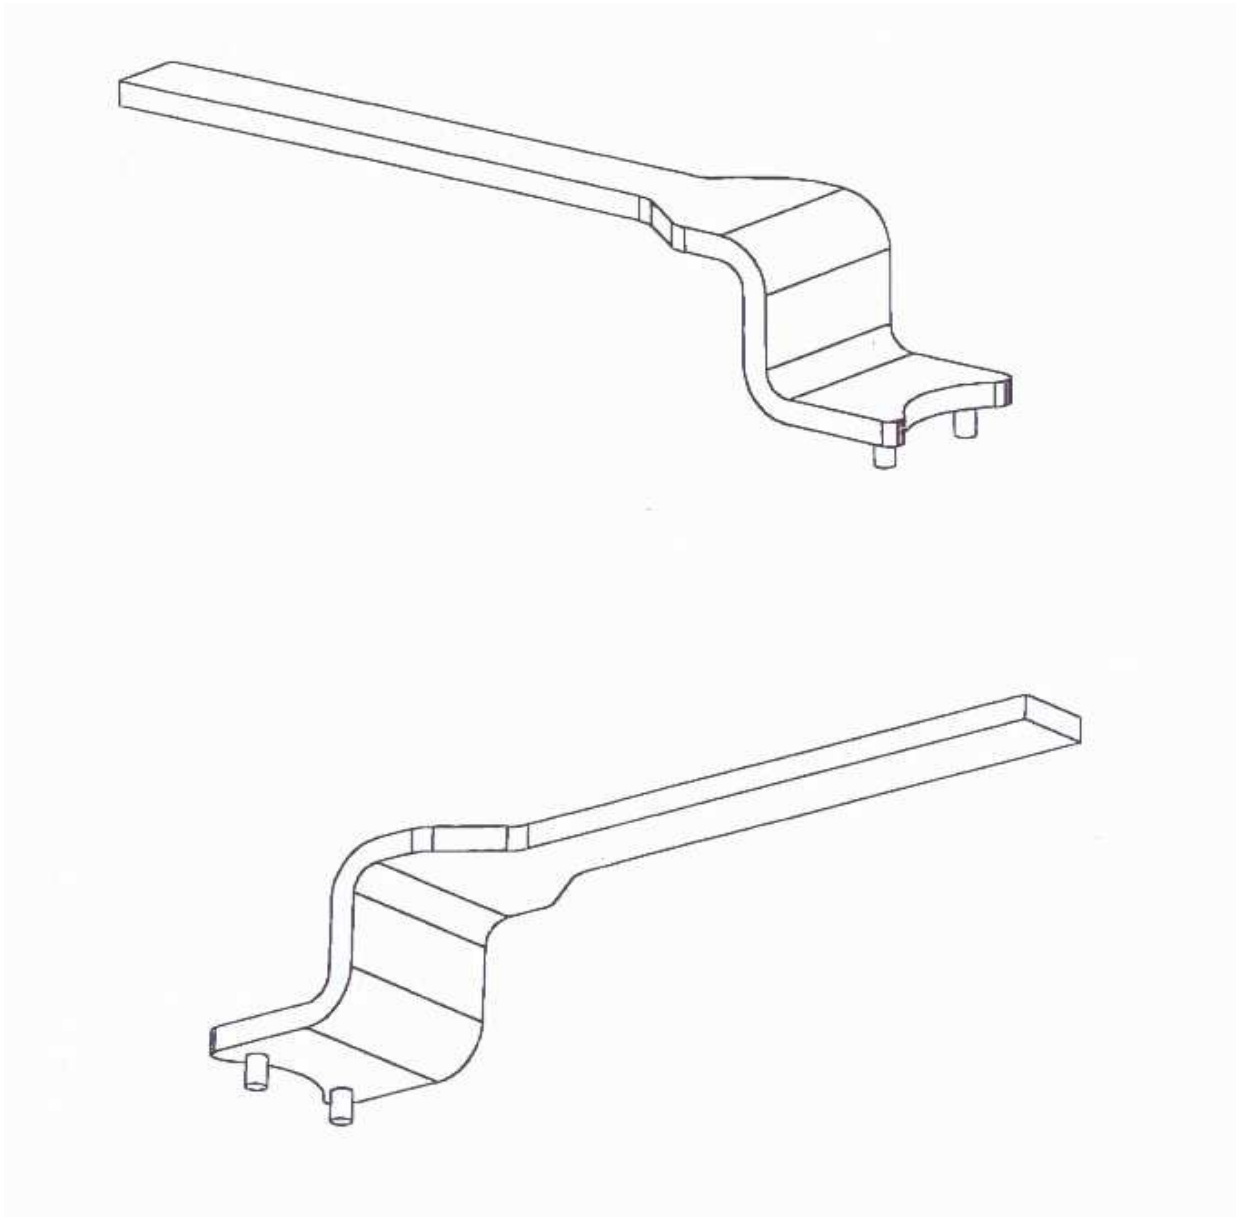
Installation Tool (Ref. Schley P/N 86400)
